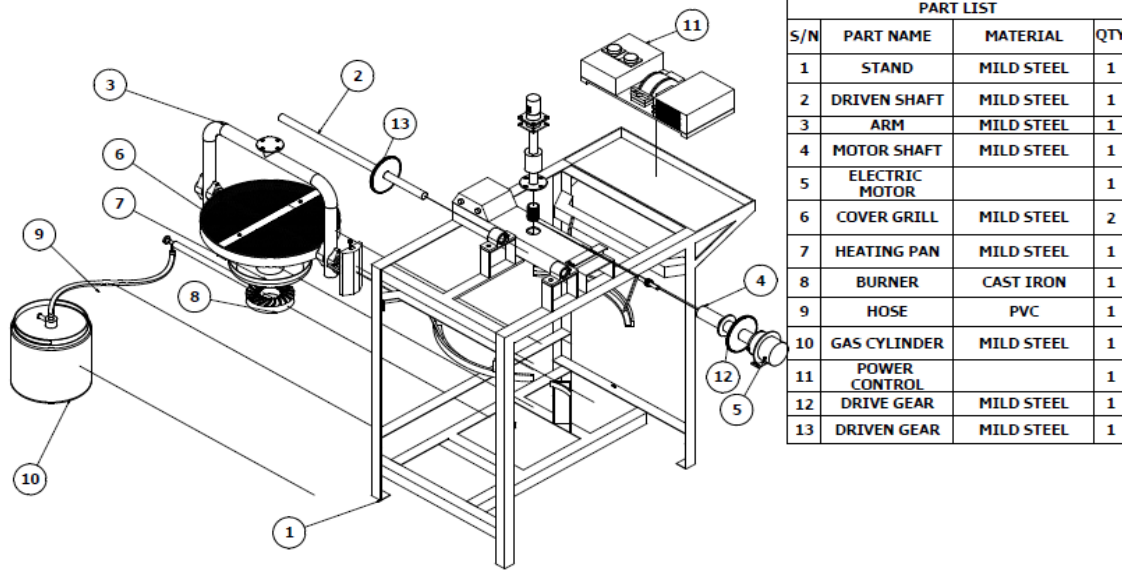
Exploded View of the Gas Fired Meat Roasting Machine
